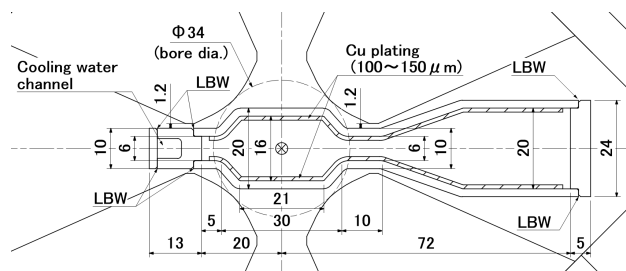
Cross-sectional view of quadrupole magnet and straight section chamber. Cu plated top and bottom plates are welded to side plates by laser beam welding (LBW).
